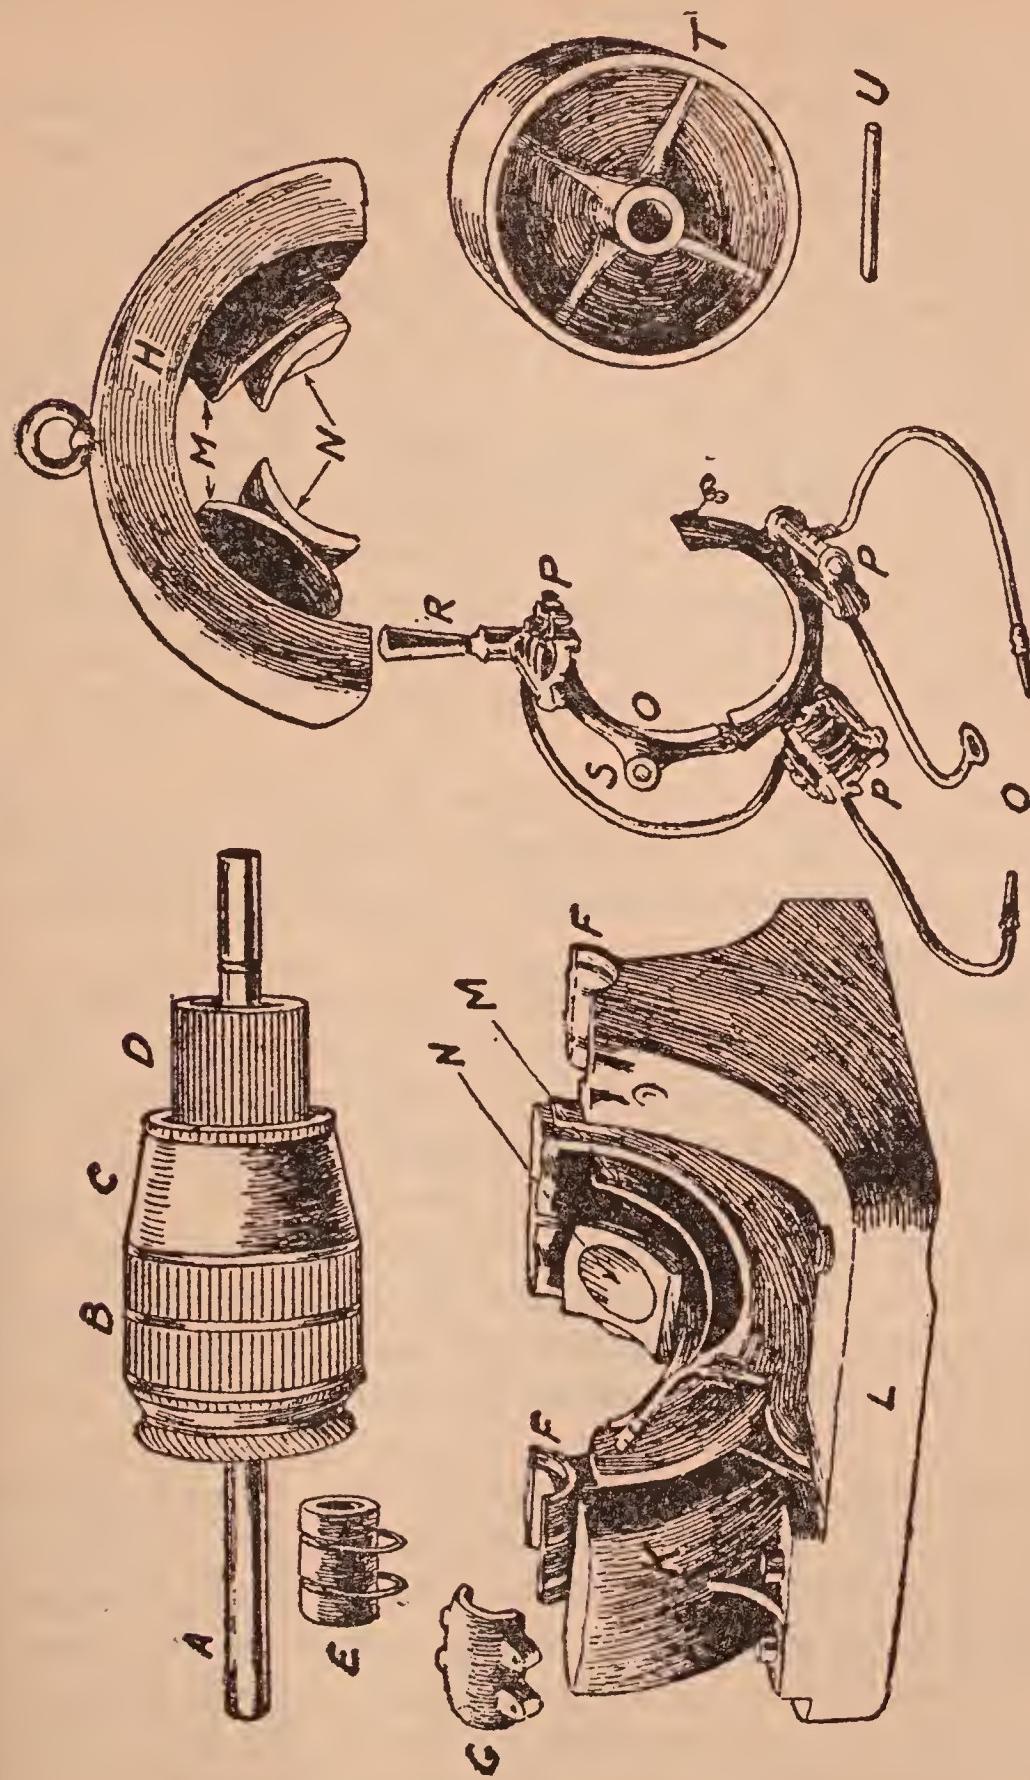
THE PARTS OF A DYNAMO OR MOTOR.
